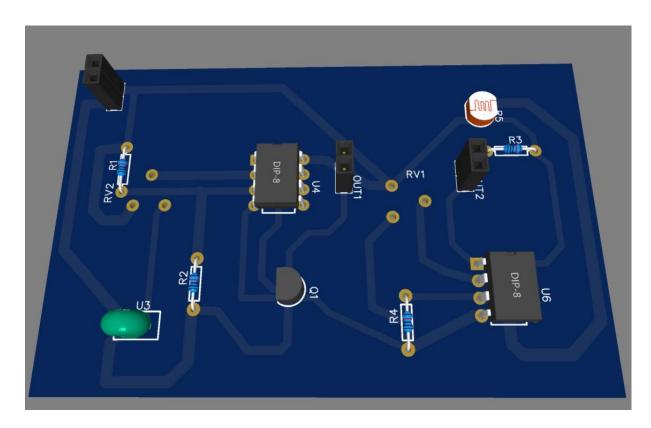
D VIEW OF PCB CIRCUIT USING EASYEDA
